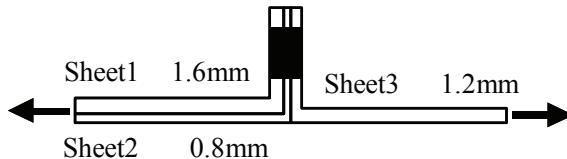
Section of specimen including 3 sheets spot weld
